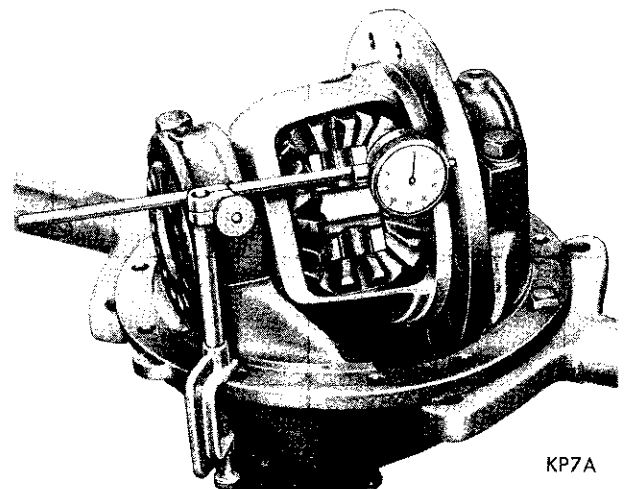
Checking Drive Gear Mounting Flange Face Runout
